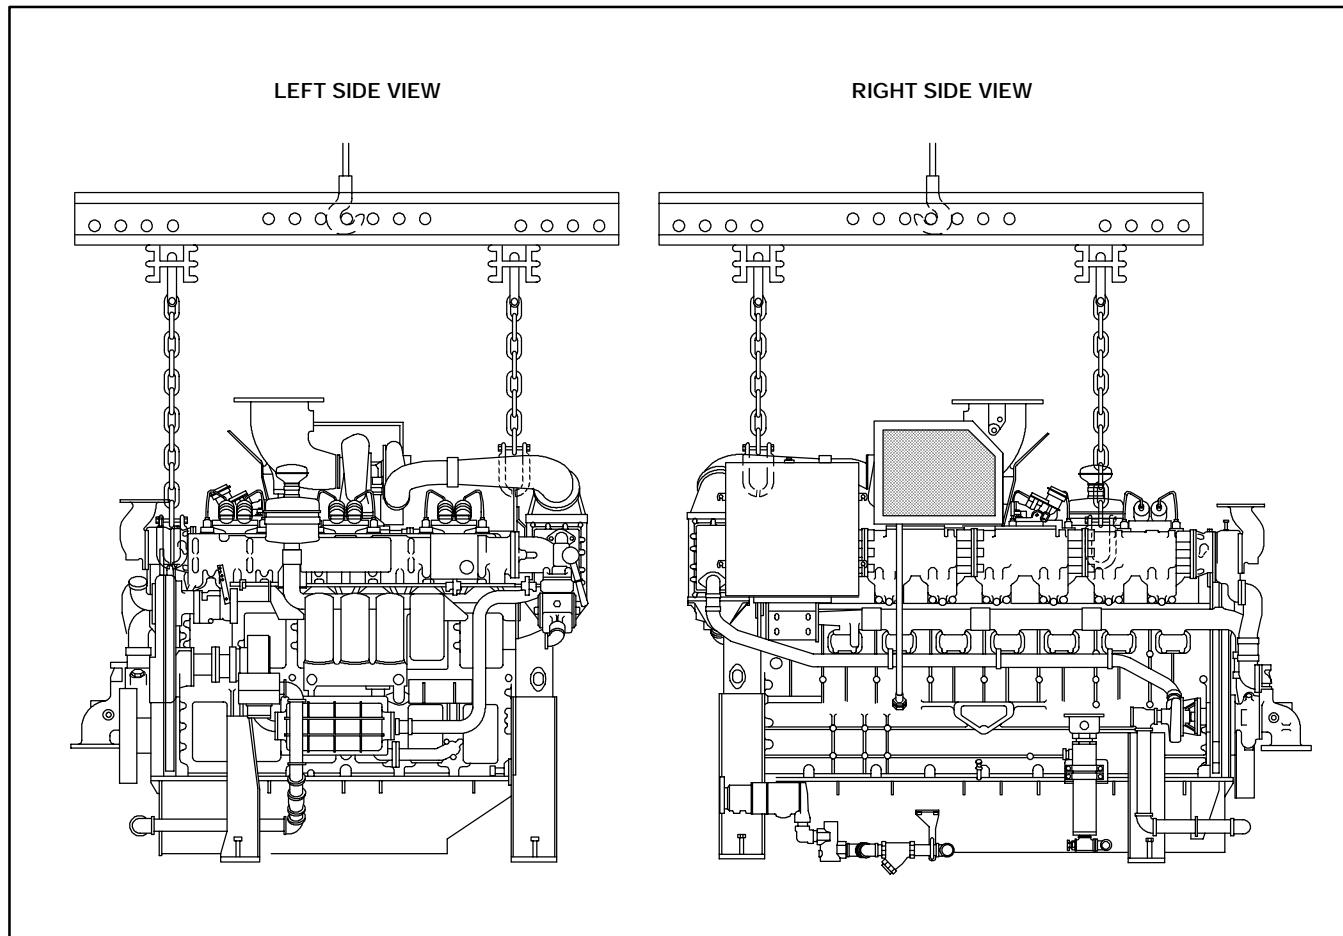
Correct Method Of Lifting Engine - Side Views
